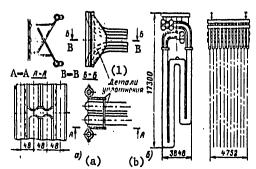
The assembly for joining the shields of the upper and lower radiative sections (a), and an installation block of the shroud type steam superheater (b).
